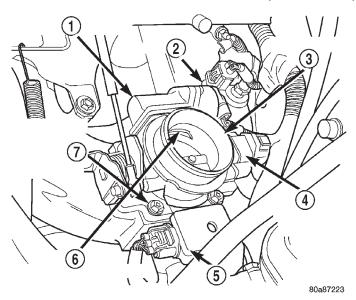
Throttle Body and Sensor Locations—2.5L Engine
